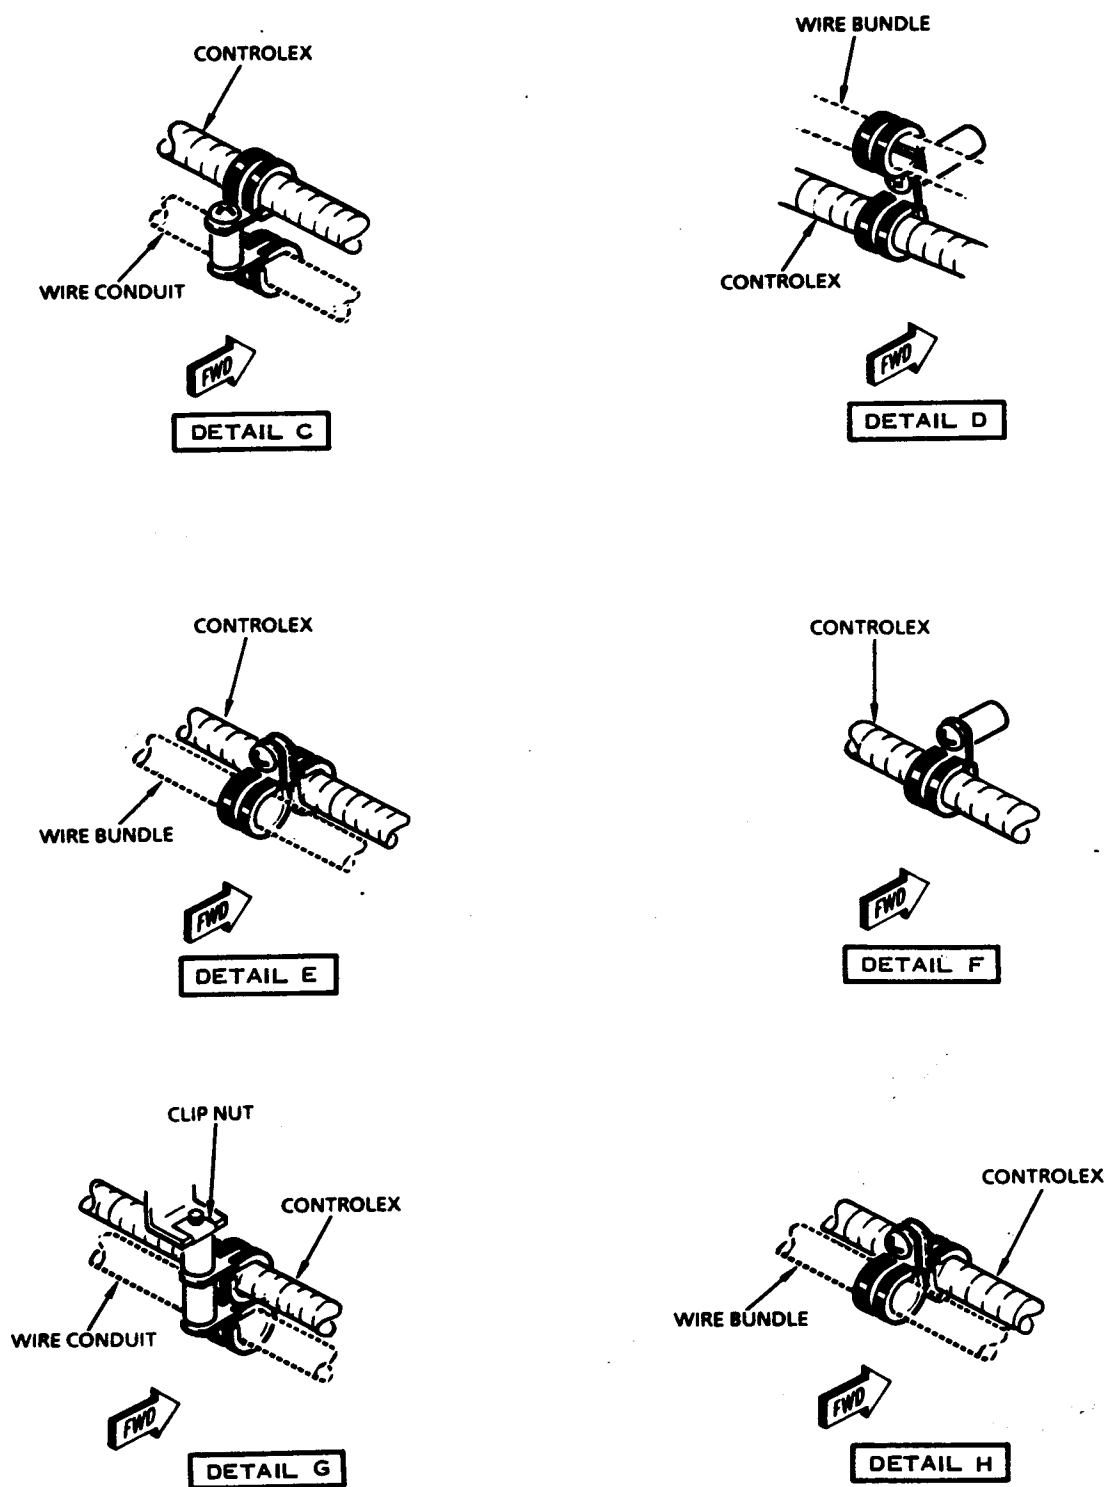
A. Clamping and Routing of Wingfold Push-Pull Control Assembly (Sheet 2)
